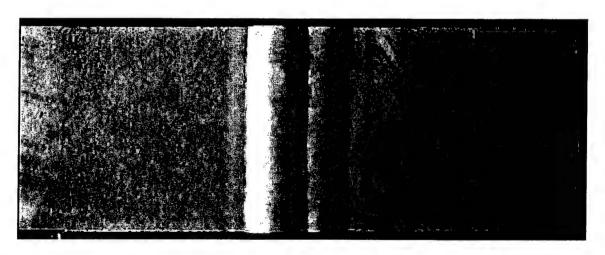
T87-T87 With 2319 Filler Metal Corrosion Specimen After Chemical Cleaning.
